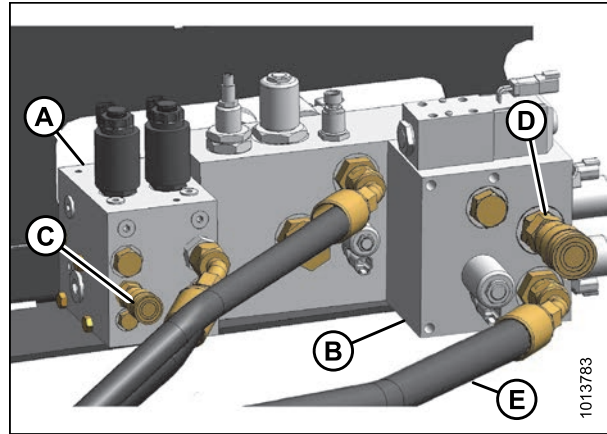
Valve Blocks with Reverser Valve Configured for Auger Header
